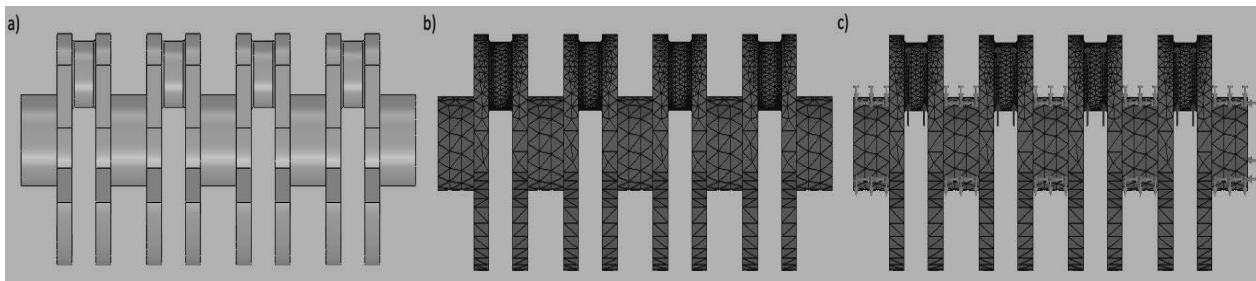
CAD model of the crankshaft (a); with finite element mesh superimposed (b); with finite element mesh superimposed, force direction visible and geometry immobilized (c)
